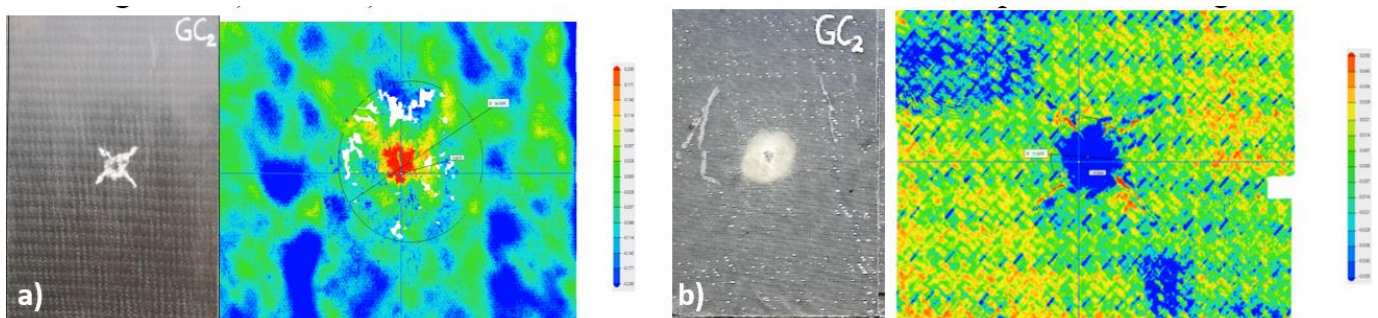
(a) Front, (b) back sides laser scan measurements of sample GC2 damaged area.
